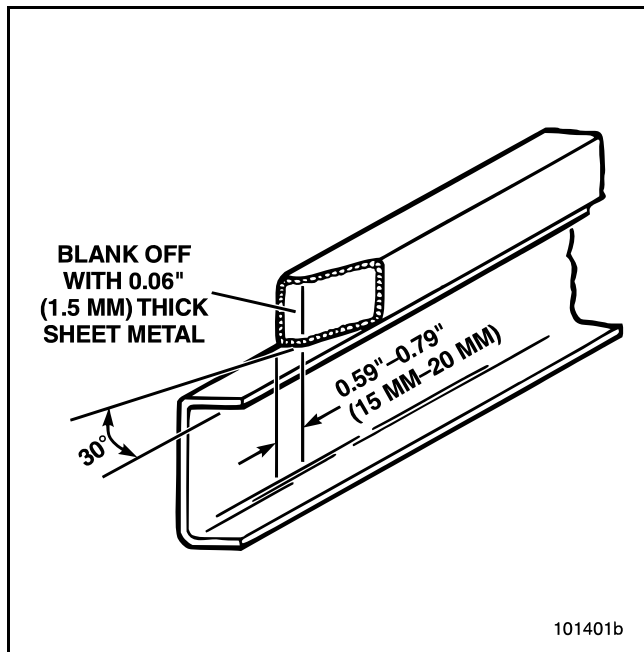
End-Cut Design for Square or Rectangular Tube Subframe
